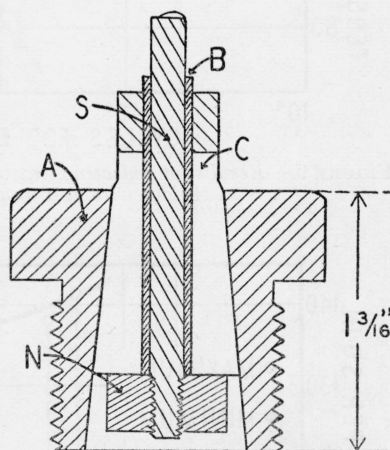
Gripping device for attaching specimens of wire to Haigh alternating-stress testing machine.
